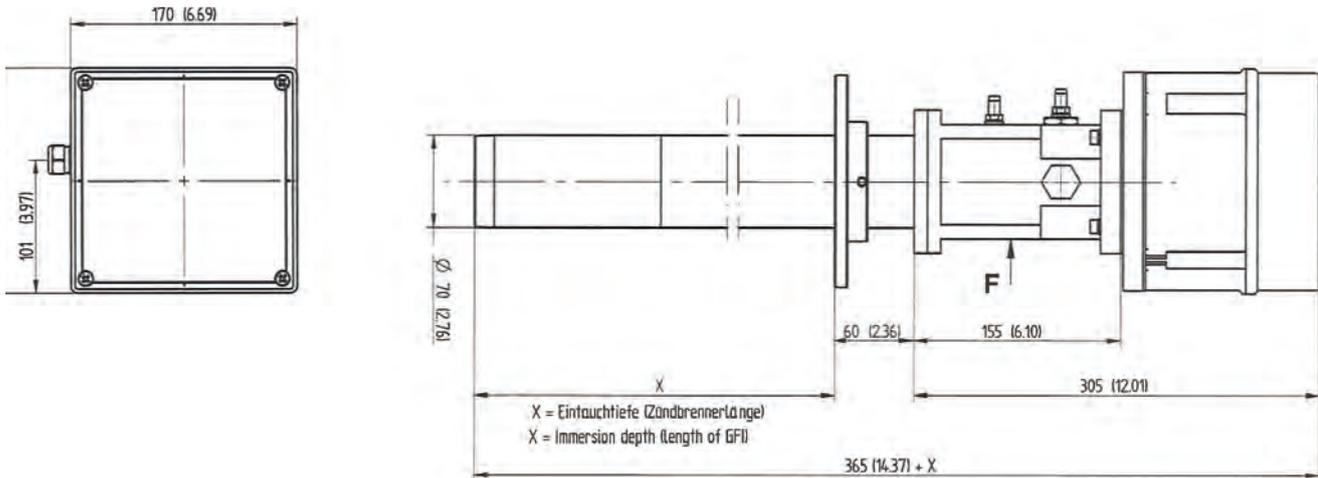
Dimensions of GFI70 pilot burner Ex-Zone 2
